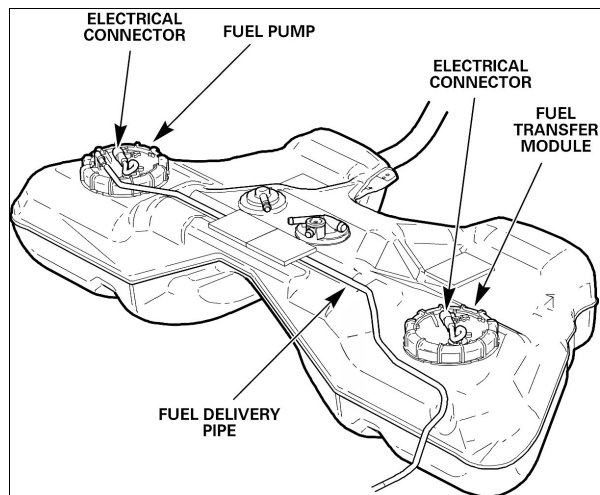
S-TYPE FUEL TANK (N/A ENGINES)
